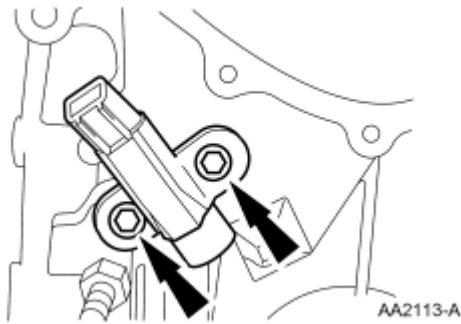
Locating Crankshaft Position (CKP) Sensor & Bolts
